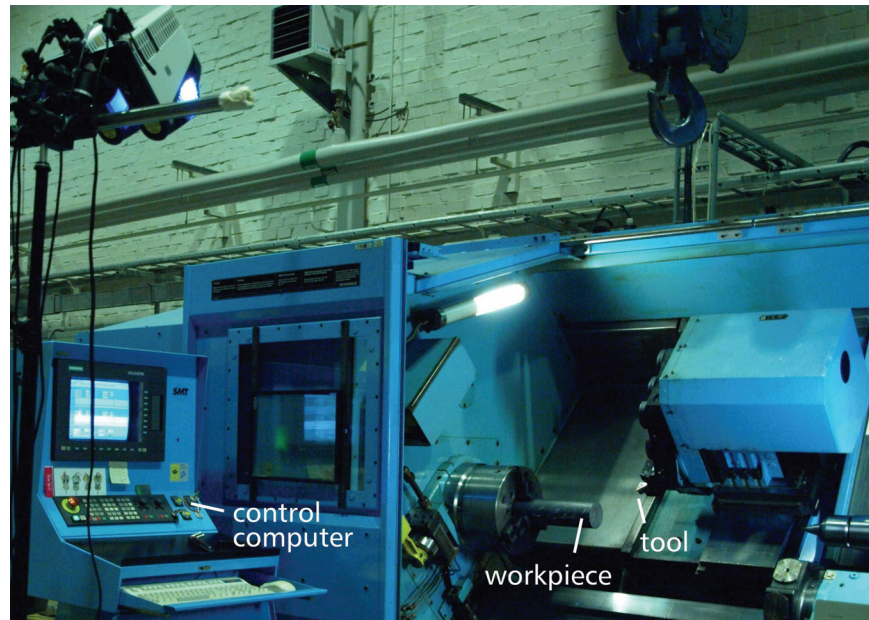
Industrial lathe (SMT Swedturn 300) with control computer (Siemens 840D). The machine doors are opened such that the tool and workpiece can be clearly seen.
